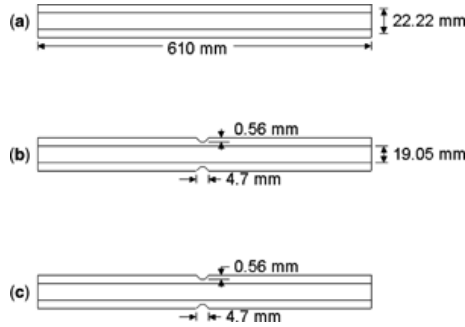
Aluminum pipe specimen: (a) defect free; (b) gouge; (c) removed metal. All pipes have same length, outer radius, and inner radius (Ref. 64).
